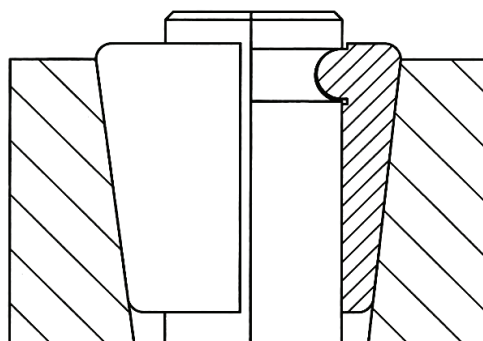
Single groove collets with halves *not* butting, allowing them to grip the valve stem.
